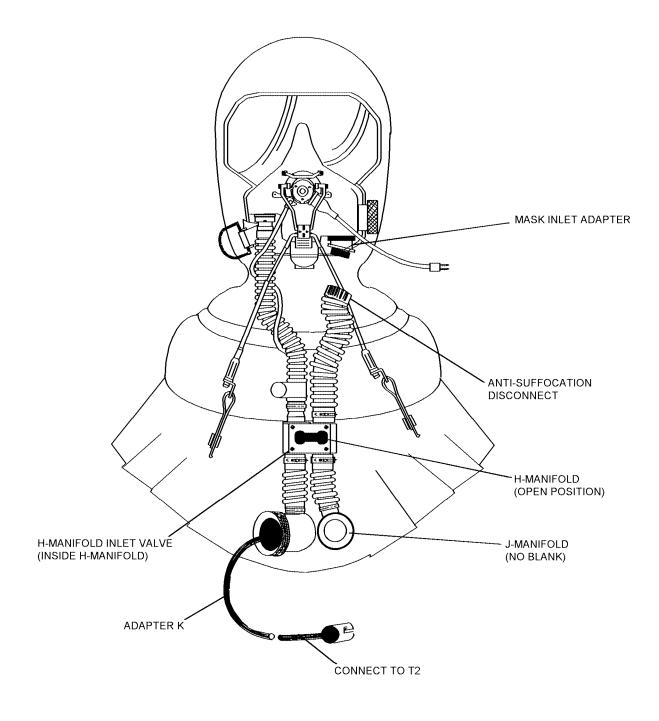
(V)2 thru (V)4 Variants - H-Manifold Inlet Valve - Reverse Leakage Test
